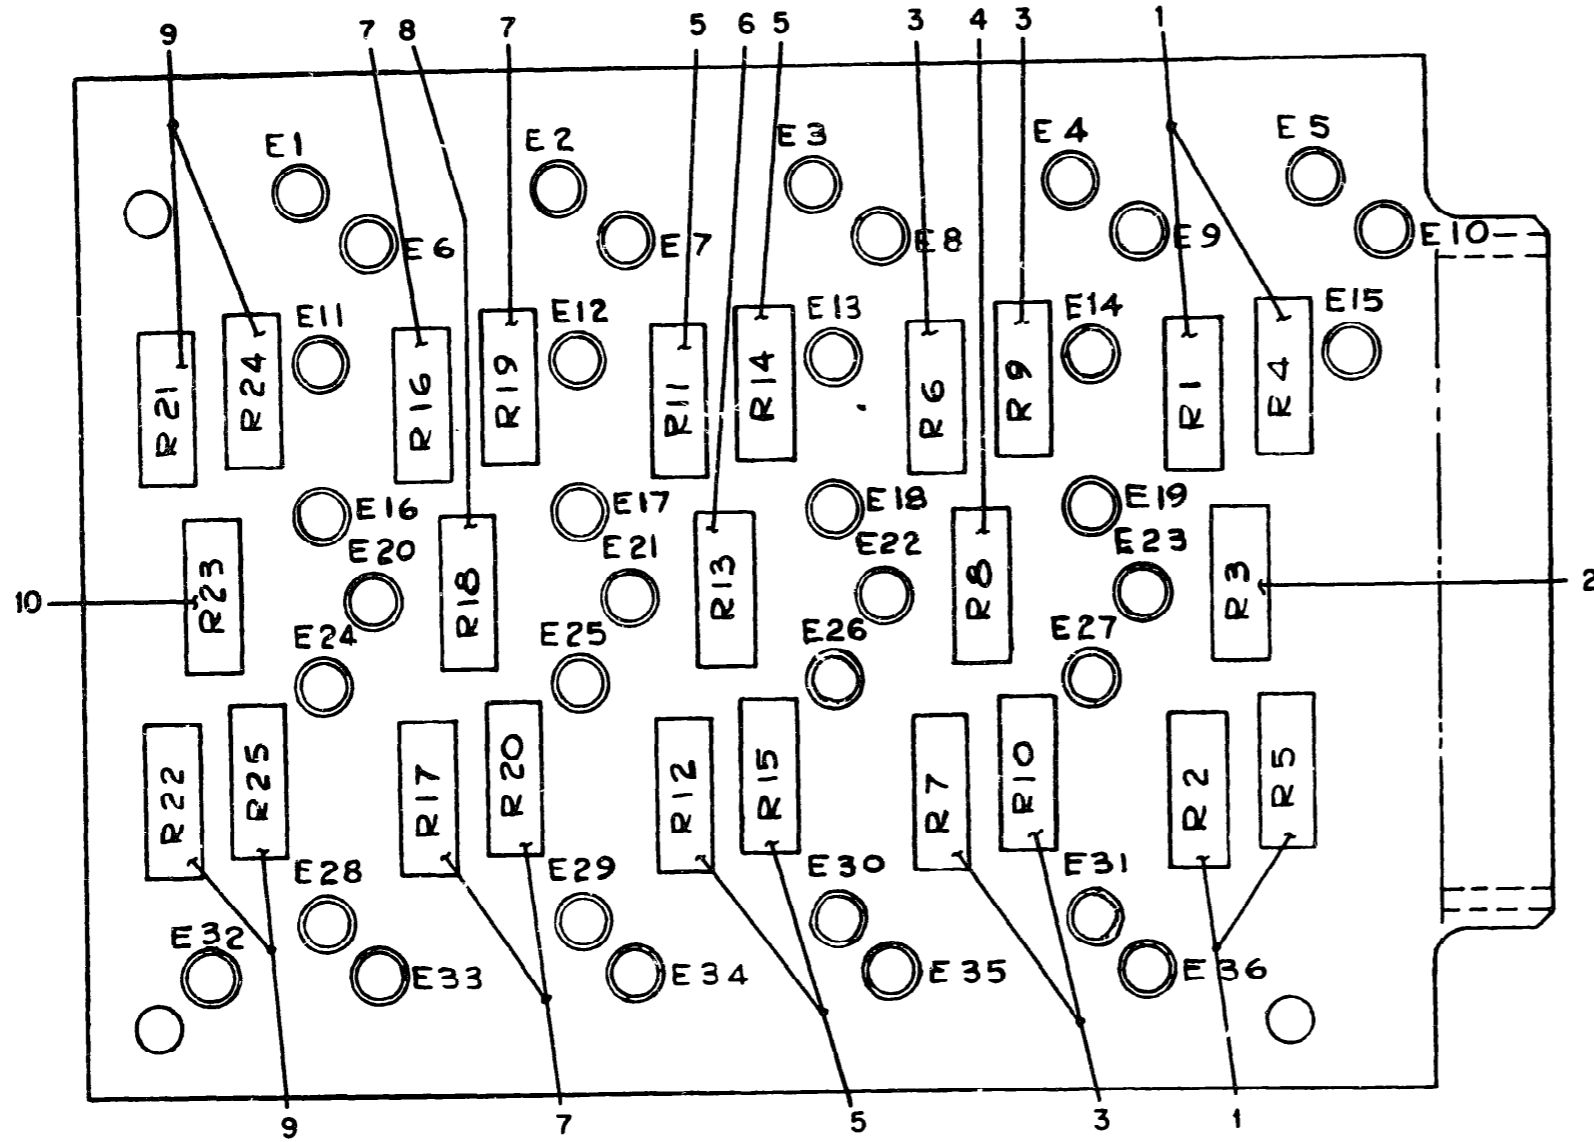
Printed Circuit Board. 5 Pad Attenuator
